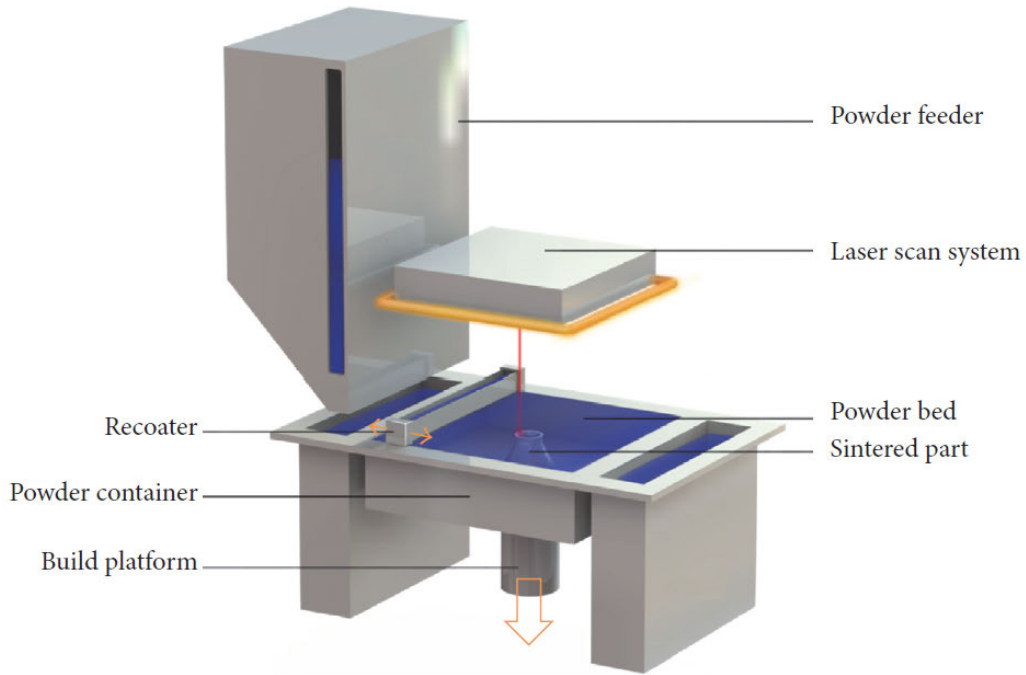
Selective Laser Sintering Technique (adapted from Hofland et al. [19])
